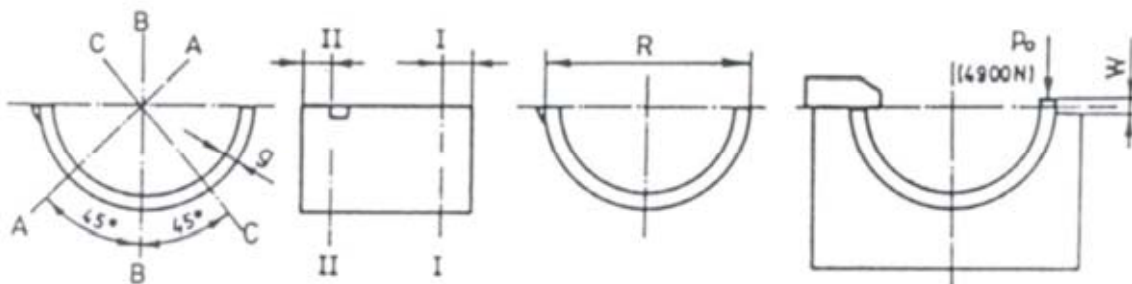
Half-bearing prepared for testing on the SMOK tester: a-shape design and dimensions of standard half bearing; b-dimensions measured for the bearing after testing (after modification - reducing the length of the standard bearing), g-bearing shell thickness, R-spread, w-overlap
